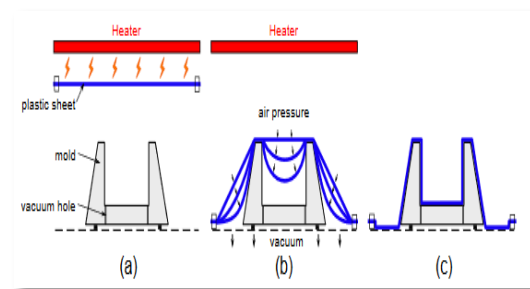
Typical vacuum thermoforming process. a) A plastic sheet is heated until soft enough for forming b) then it is loaded to the mould; upon contact with the mould it begins to deform. The air below is vacuumed, the atmospheric pressure forces the plastic sheet to conform to the mould shape c) after cooling down, the plastic is hardened into the new shape [6].
